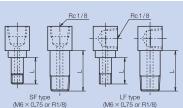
Grease fitting and tube fitting Standard lubrication accessory is B type.
